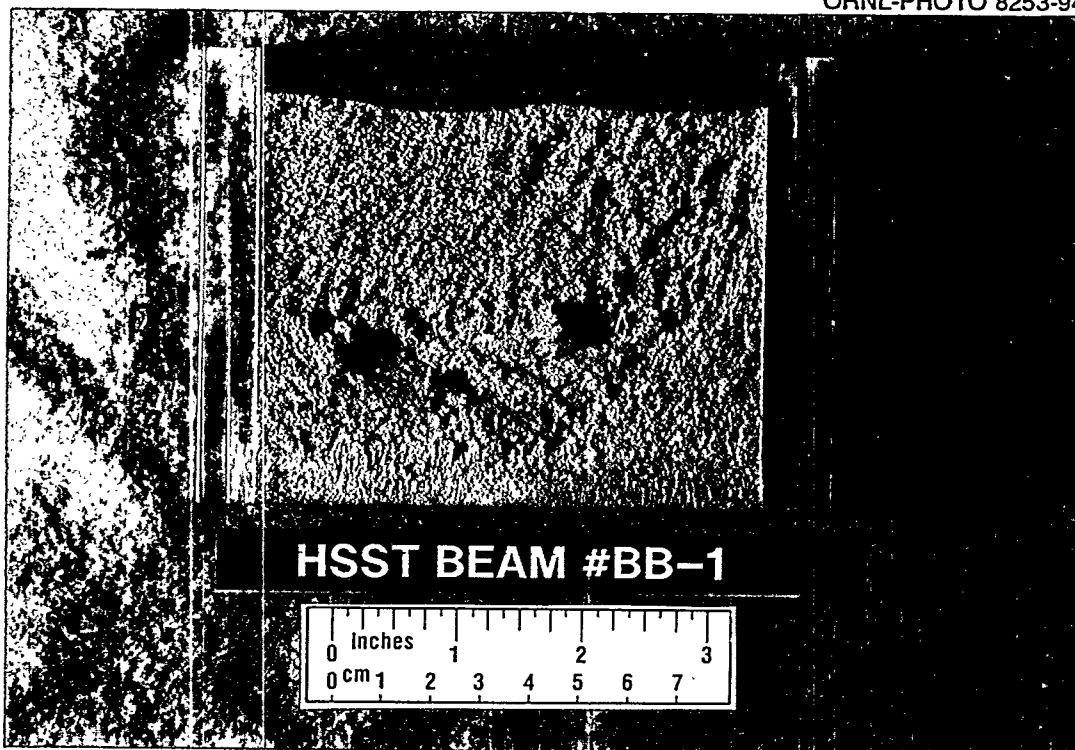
Fracture surface for shallow-flaw cruciform specimen BB-1 with fracture initiation site indicated
